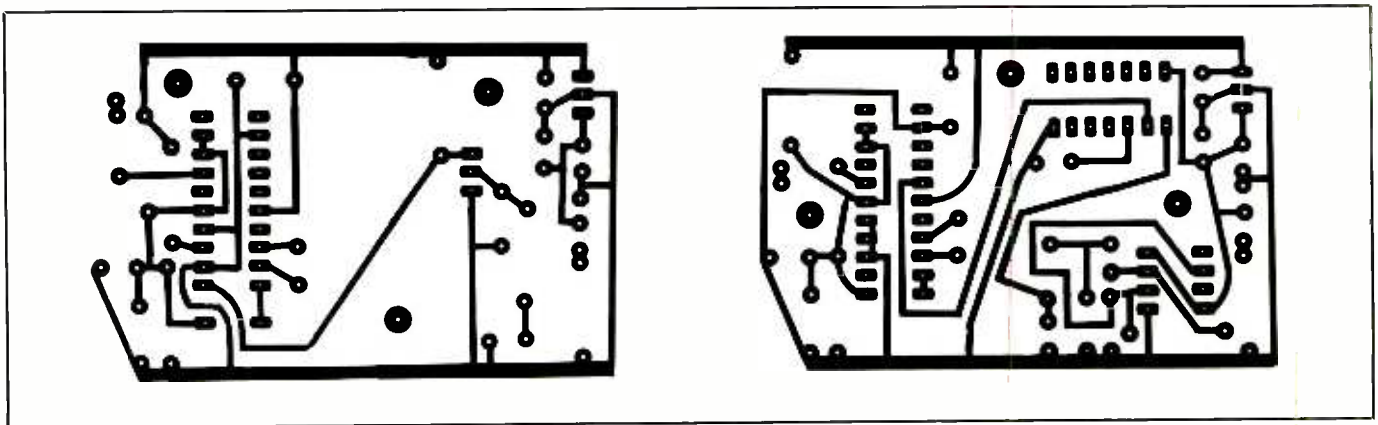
Actual-size etching-and-drilling guides for the transmitter's (A) and receiver's (B) printed-circuit boards.
